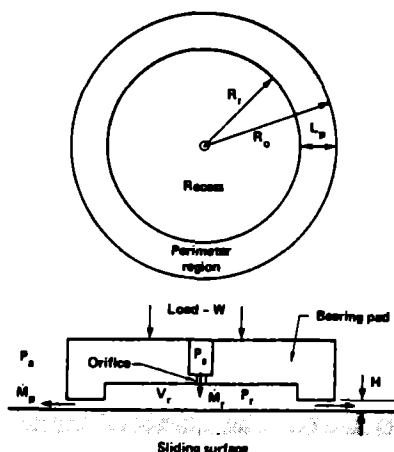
Geometry of a Typical Externally-Pressurized Gas Bearing.
